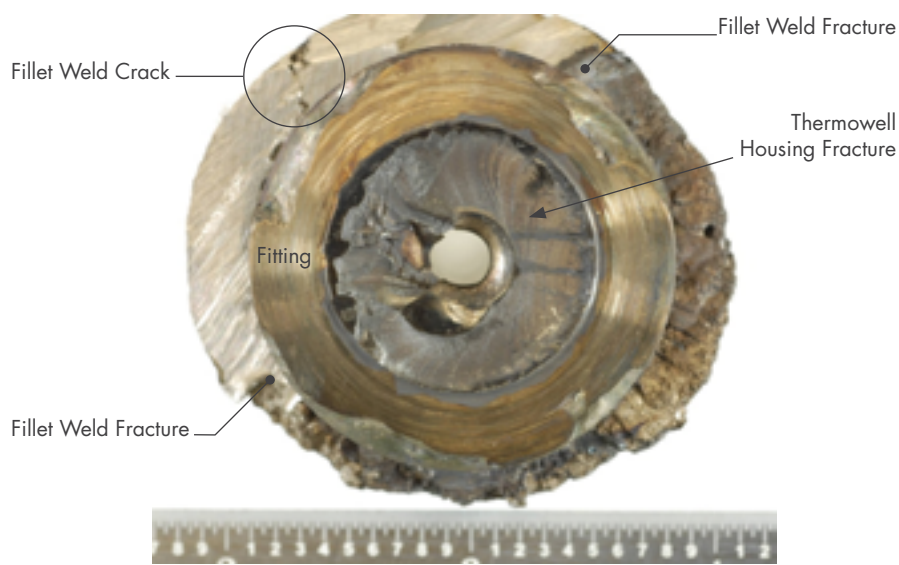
Overview of the fractured end of the thermowell housing looking toward the fitting and the fractured fillet weld joining the fitting to the pipe.
